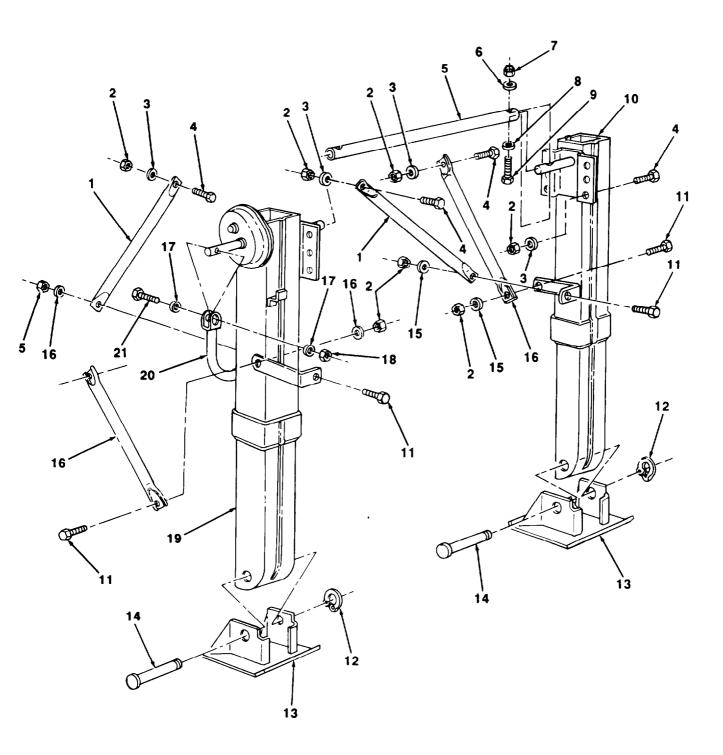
Landing Gear, Crank Handle, Pads, Brackets, and Related Hardware.
